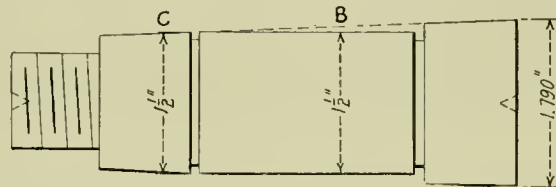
Standard Pin With Greatest Extreme of Taper End Sizes
